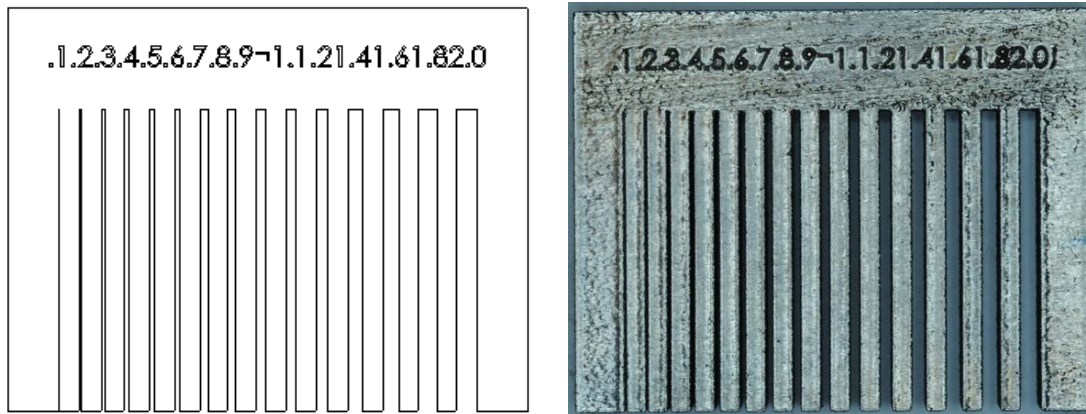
Images of the flat plane slot resolution benchmark CAD drawing and final printed part in Ti64Al.
